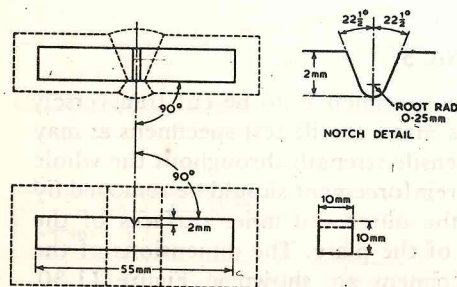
Specimen No. 5 Charpy V-notch impact test specimen
